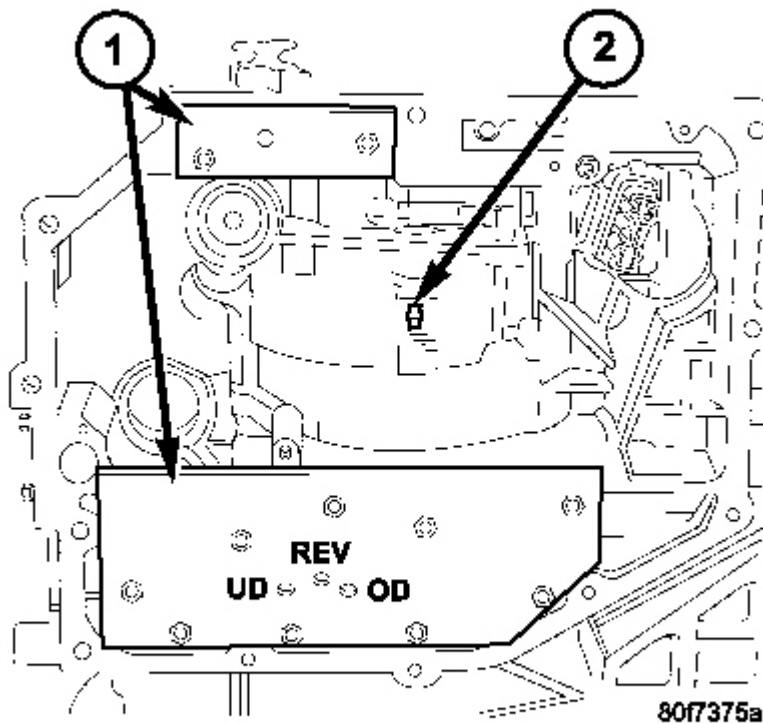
Air Pressure Test Plates & 2/4 Clutch Retainer Hole
